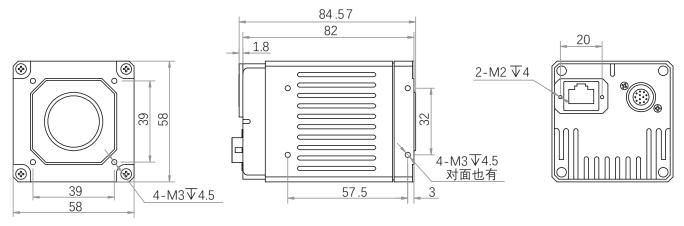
Mechanical Dimensions (in mm) of the C-mount GigE SWIR Cameras with 58 \* 58 \* 82mm housing (The installation uses M2 and M3 screws).
